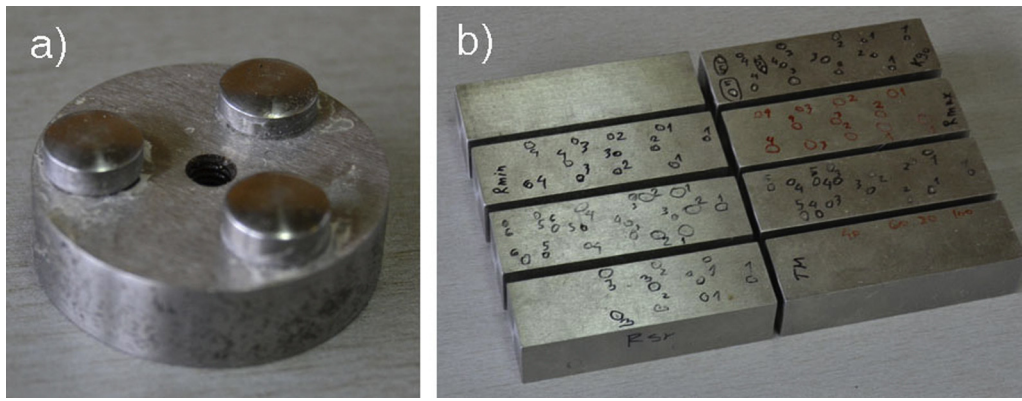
Photo images: (a) exchangeable clamping/locating elements, and (b) workpiece material specimens.
